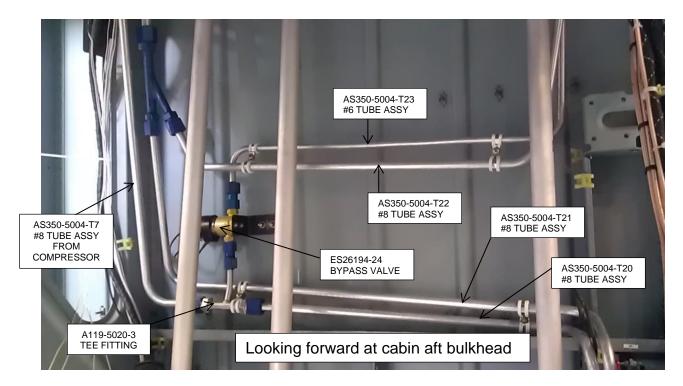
Plumbing Installation, Tail Boom Condenser
